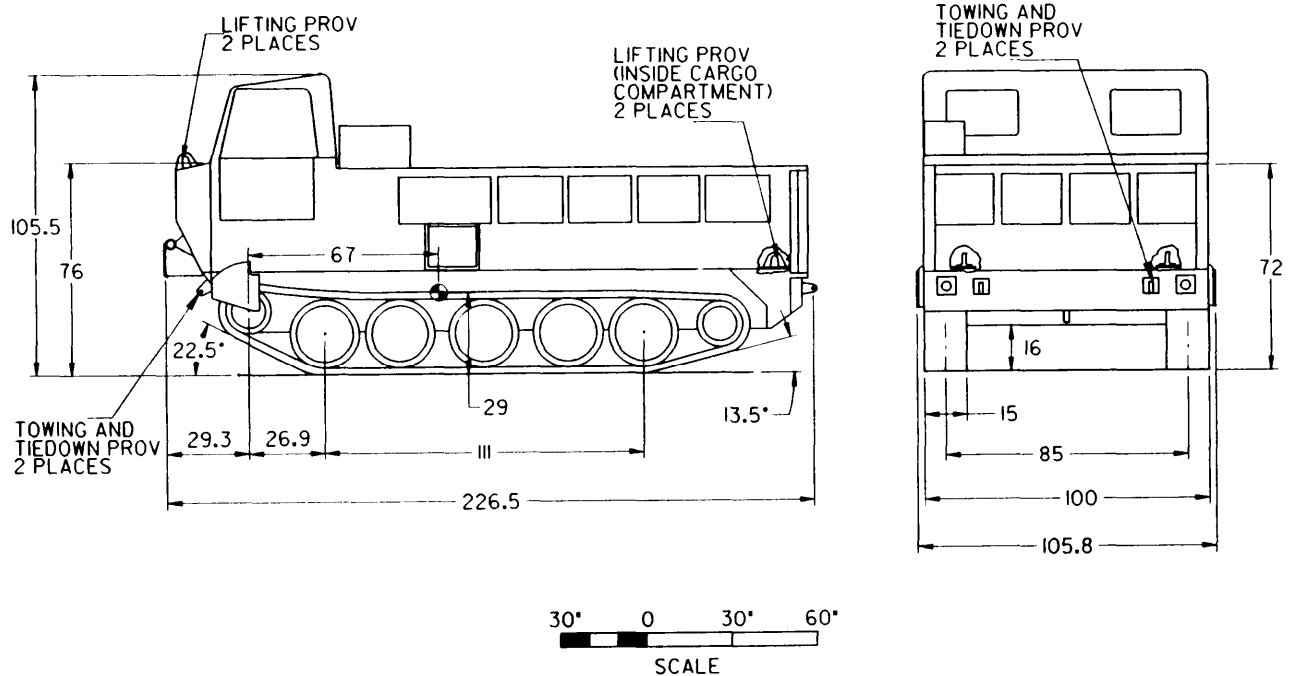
M548A1 Cargo Carrier. All dimensions are in inches.
